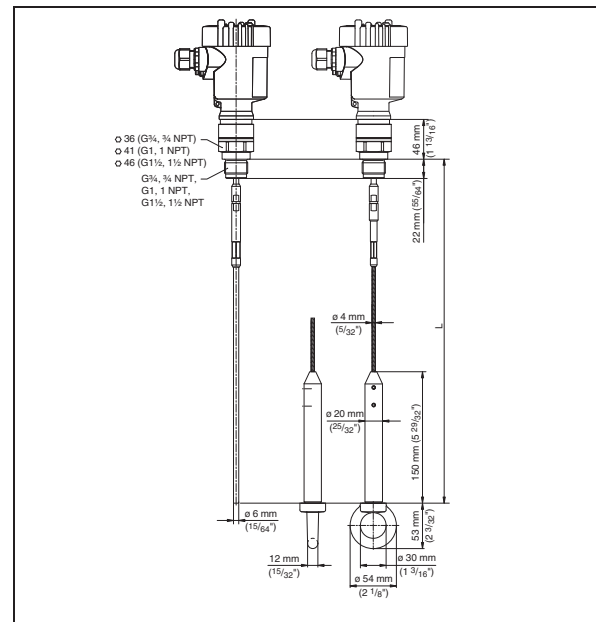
VEGAFLEX 67 - cable, rod version with thread
